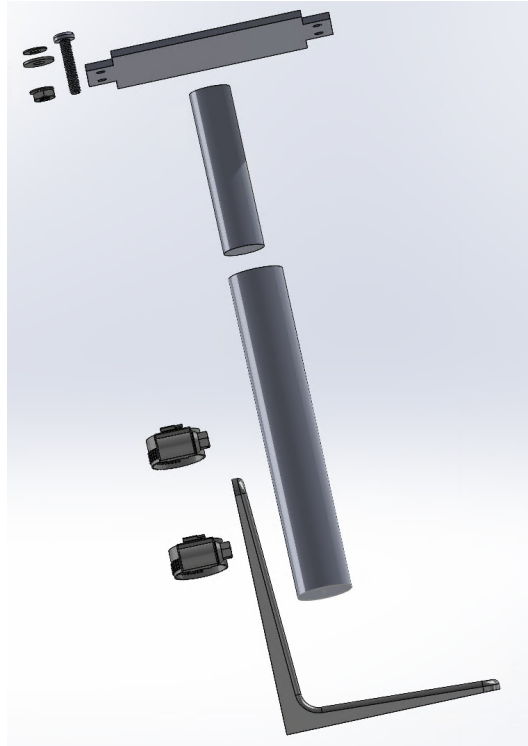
Early CAD of Electromagnet Damper (windings not shown)
